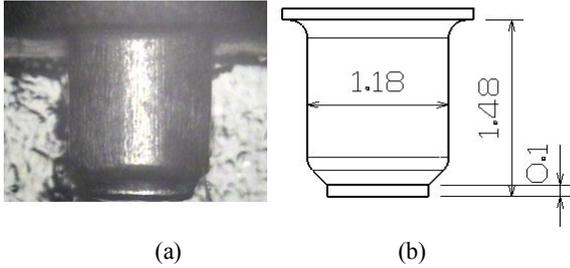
Specimen of thread rolling: (a) experiment (b) analysis model
